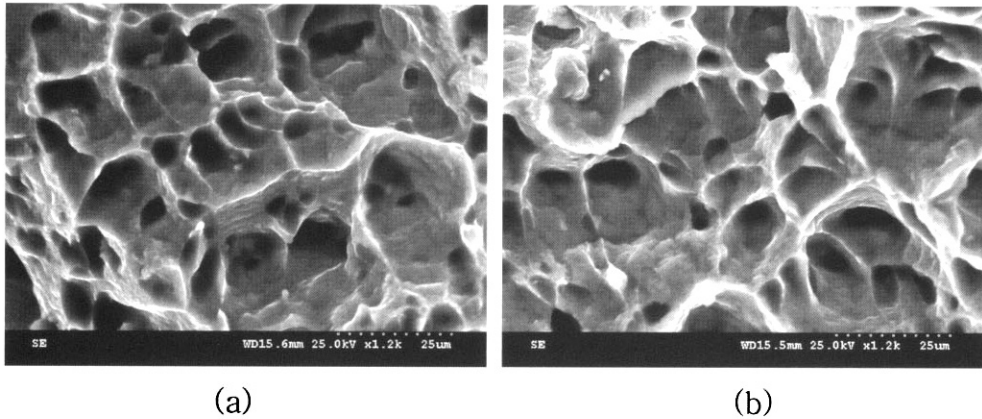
SEM fractographs of tensile test specimen as-welded (a) welds (b) base metal.
